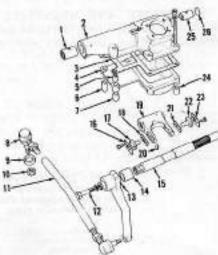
Exploded view of steering box and its related parts used on 1199 models with manual steening.
